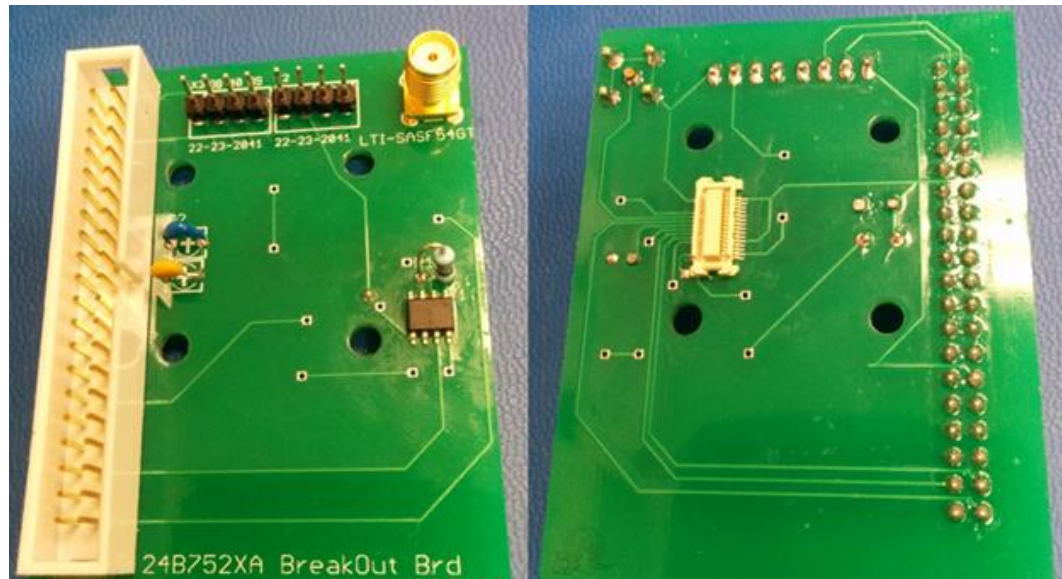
Camera Breakout Board Top View (Left) and Bottom View (Right)
